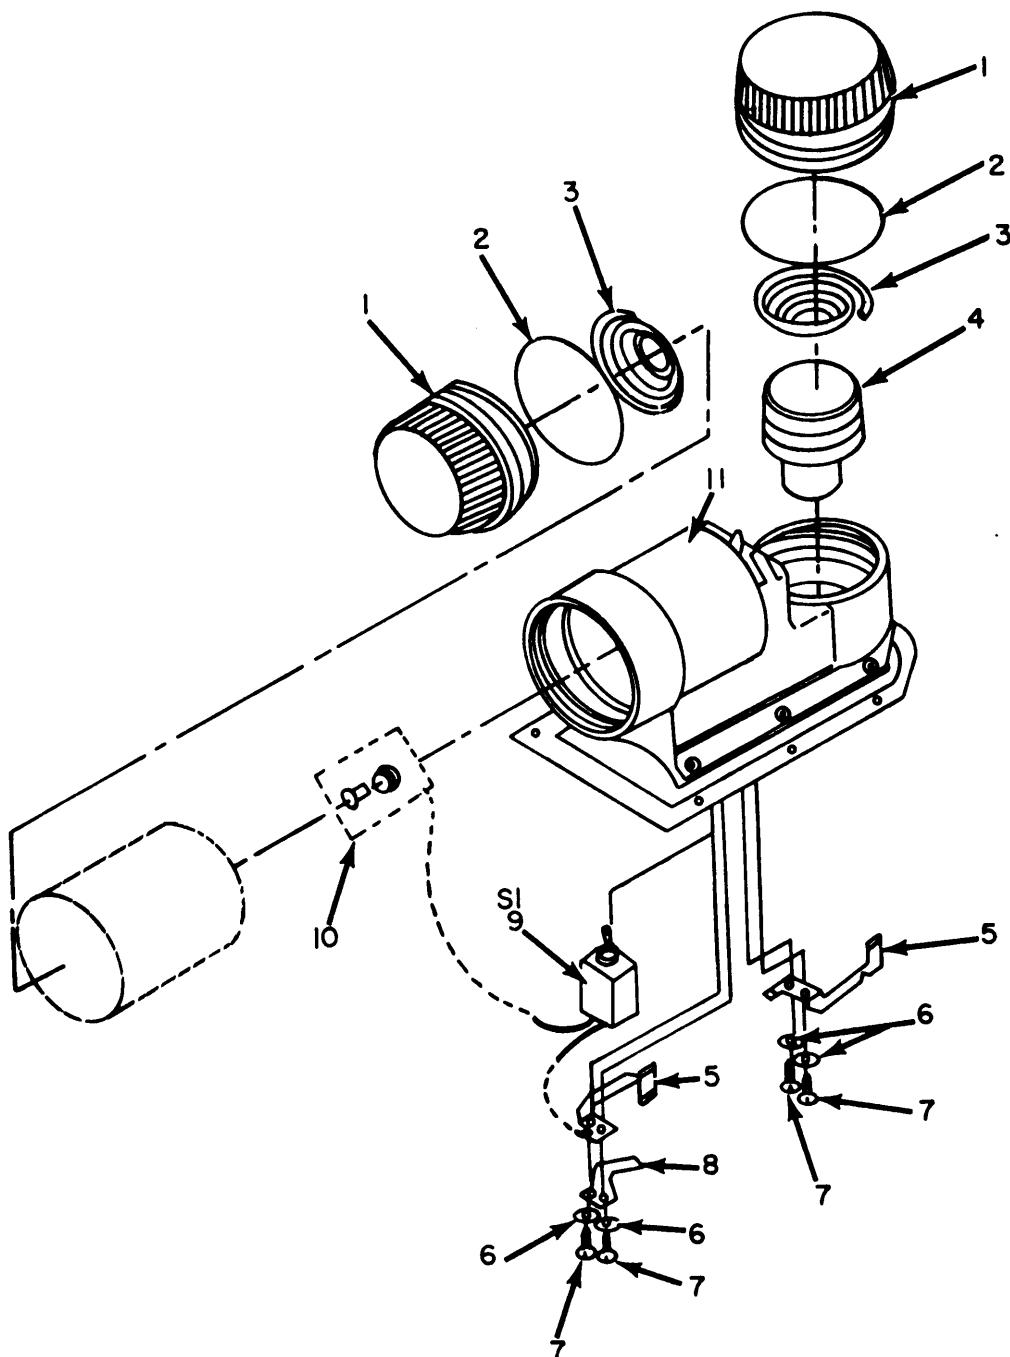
Image Tube Housing Assembly (Sheet 1 of 2).
